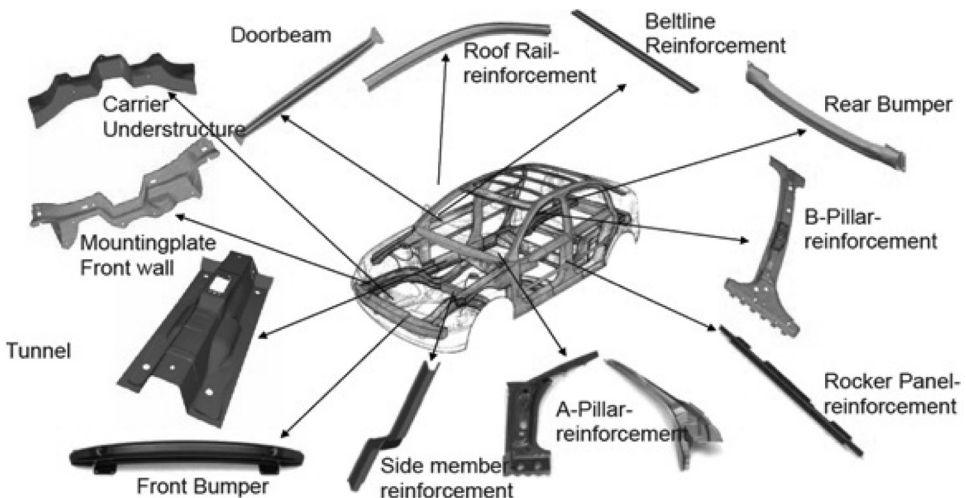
Components manufactured using hot stamping. Source: Ref 7.1
